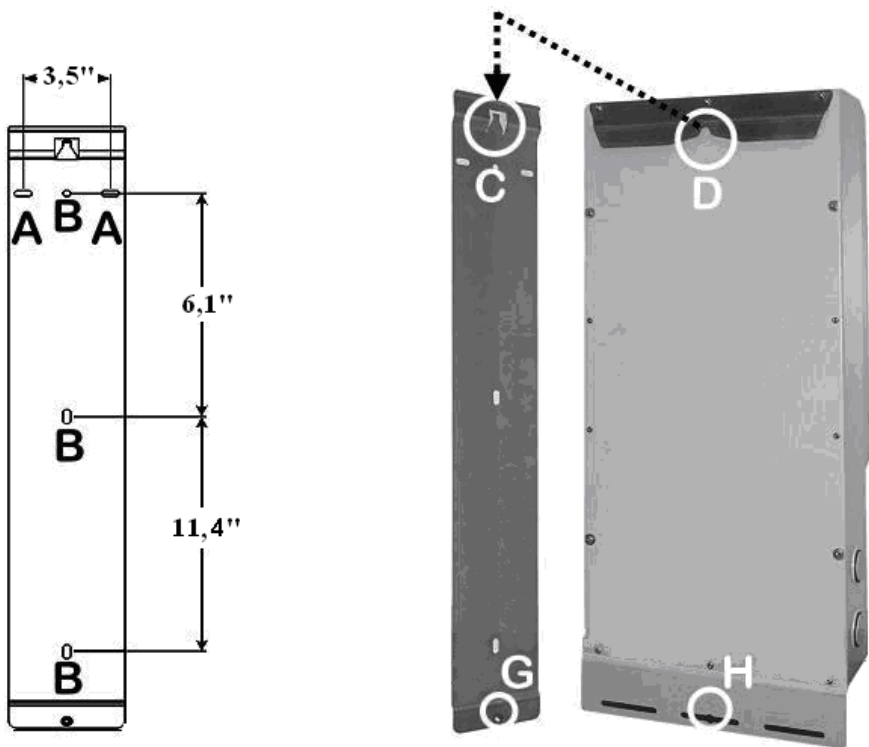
Wall Bracket and Wall Mounting (-US models)
